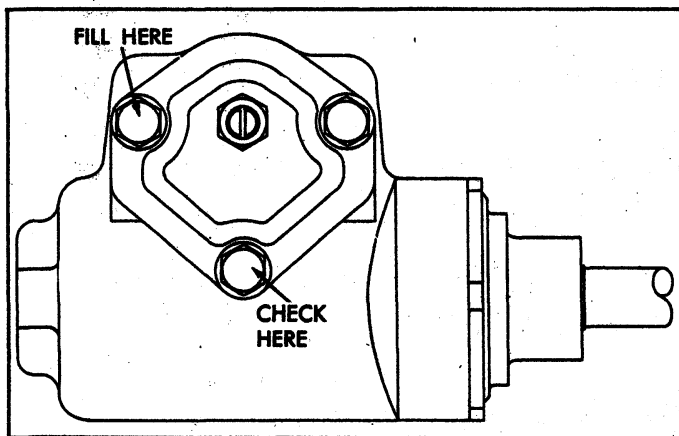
Cover Attaching Bolts—Chevy II Shown
